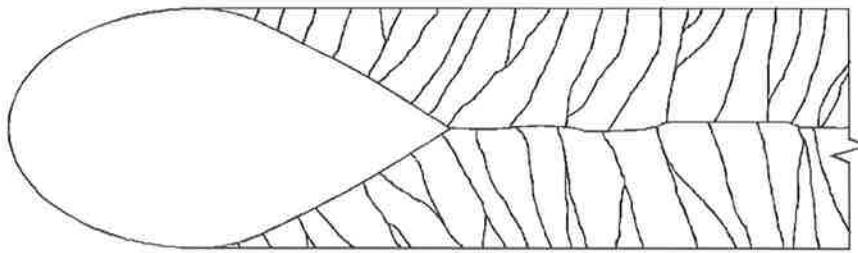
(a): Schematic representation of a tear drop shaped weld pool.
